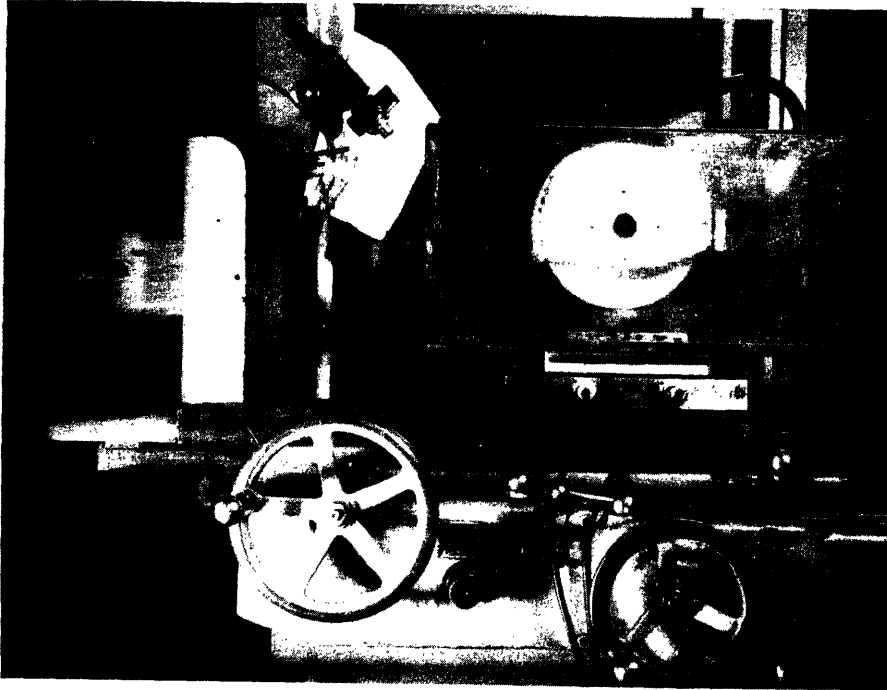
Photograph of the equipment. Note the microscope which can be positioned to view the wear flats and the box for collecting the wheel wear and chips.
